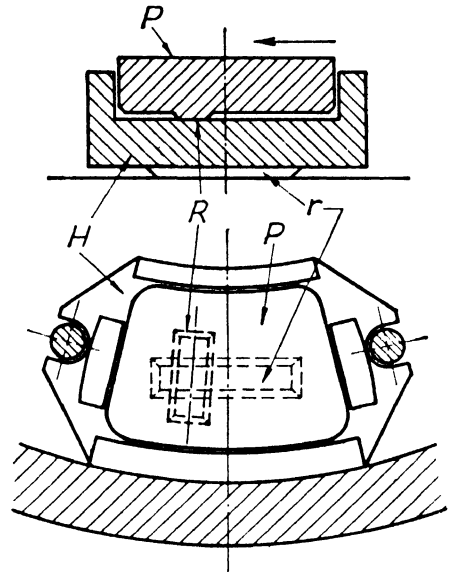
Single-pad thrust bearing for horizontal shaft
